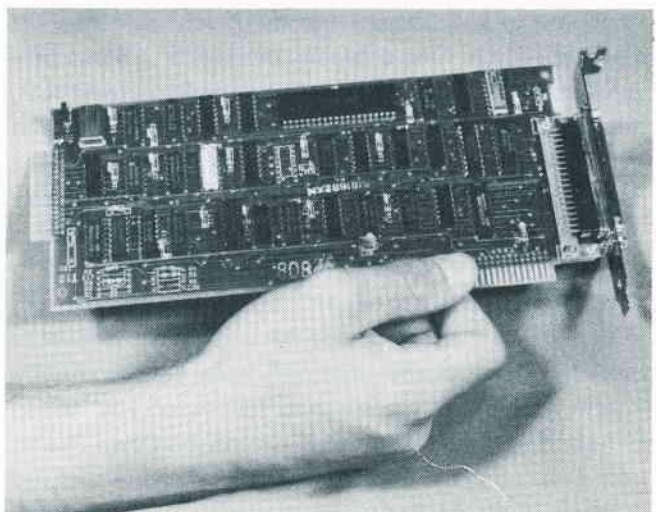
Handling a printed-circuit board the WRONG way can cause corrosion.
